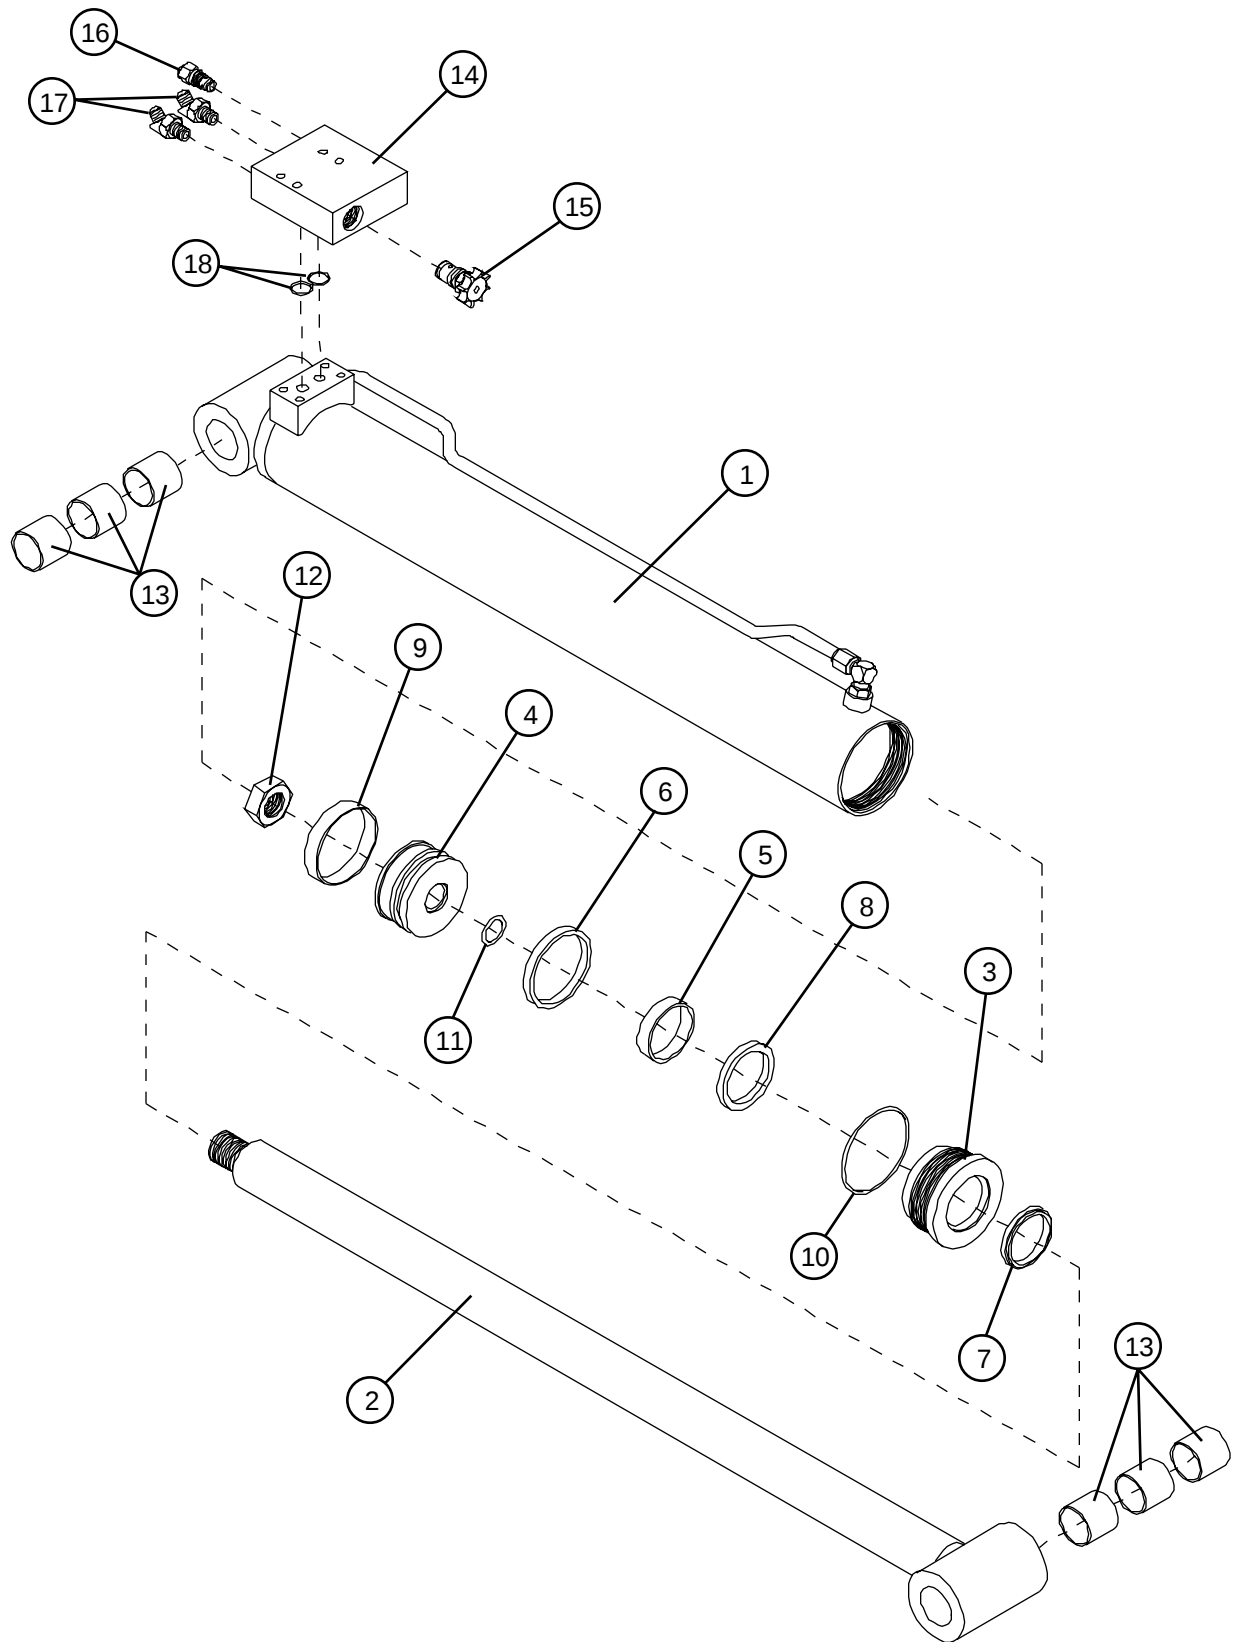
PLATFORM LEVELING MASTER CYLINDER ASSEMBLY
